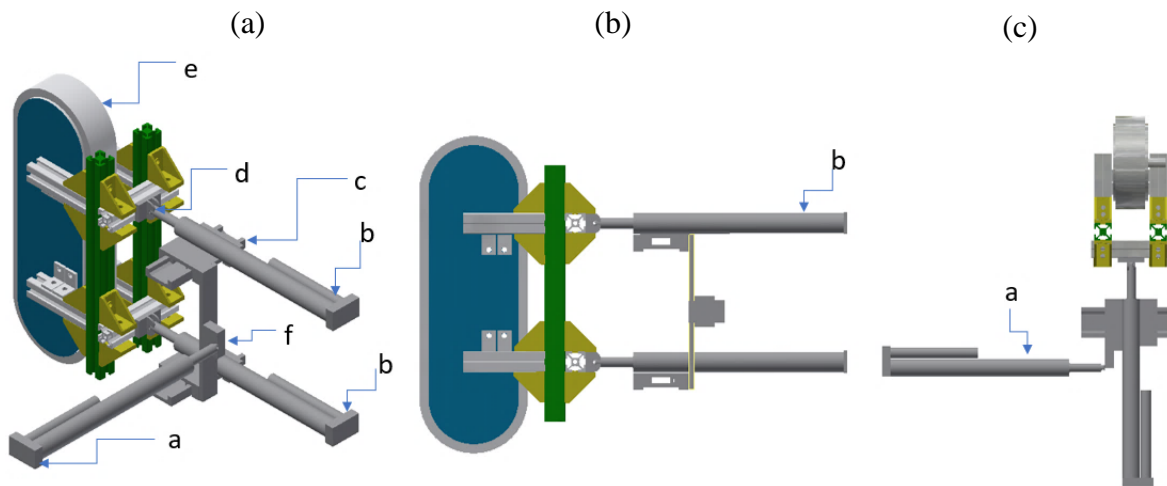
Design of the robotic manipulator; (a) design; (b) planner mode; (c) Cartesian mode
